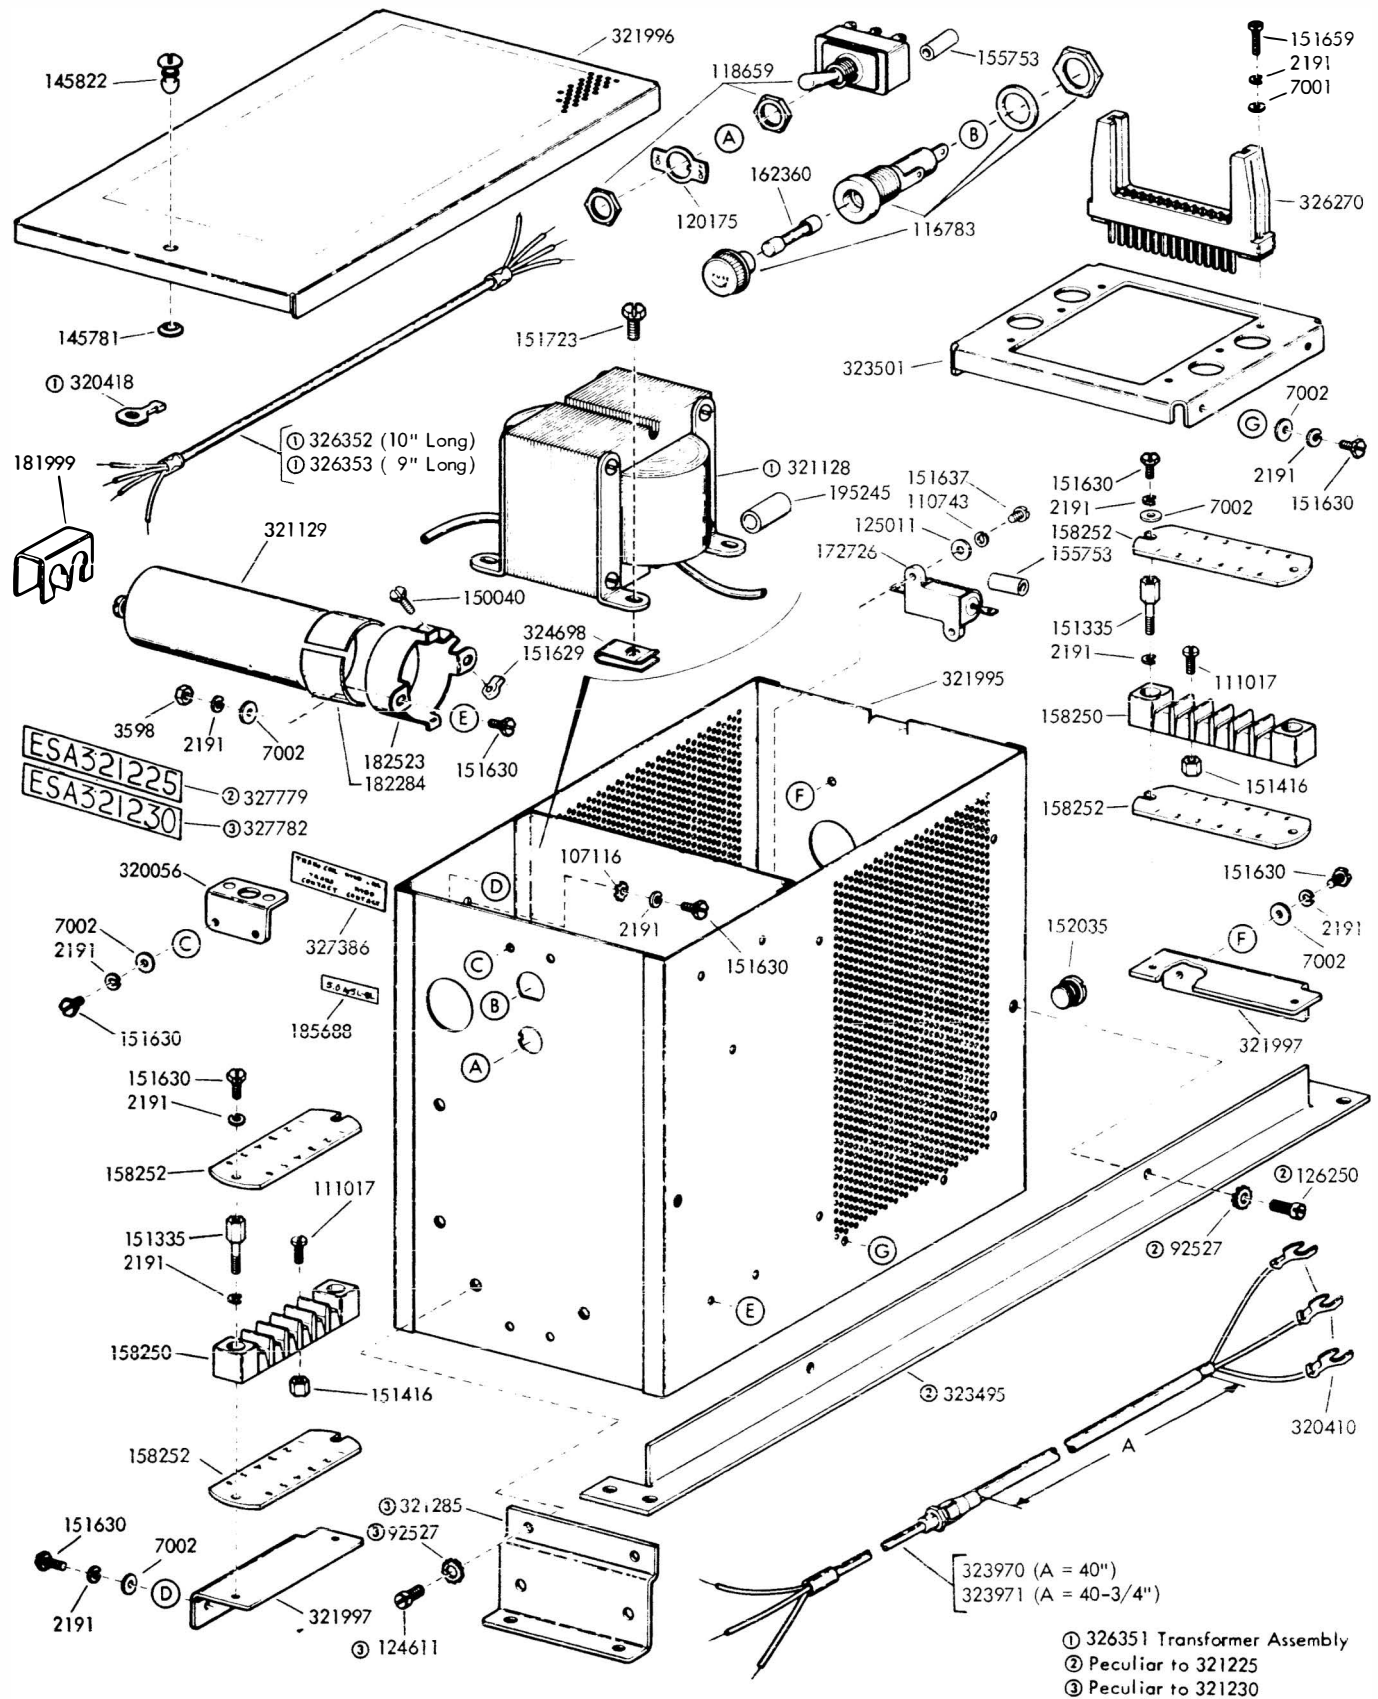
321225 ELECTRICAL SERVICE ASSEMBLY - Used w/KSR and RO Sets and
